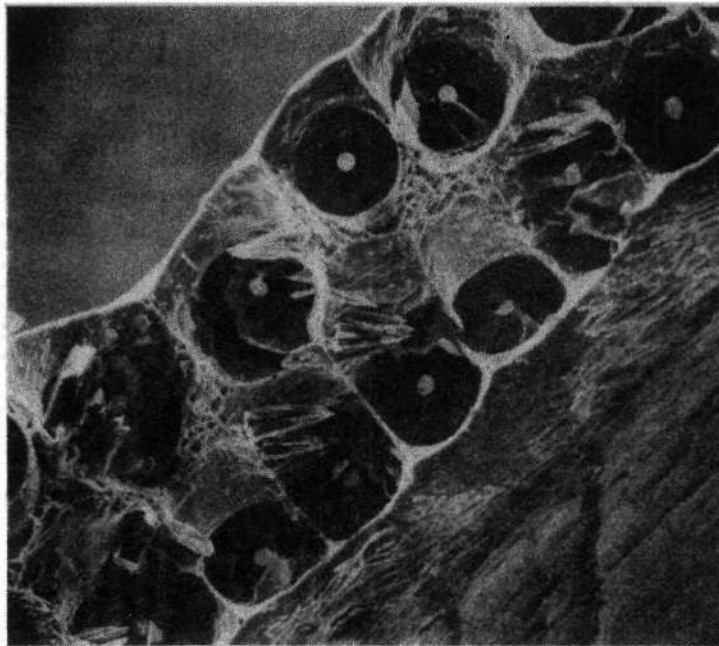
Details of a canted fracture surface in bilayer B-Al composite, 3.9 mil filament diameter.
